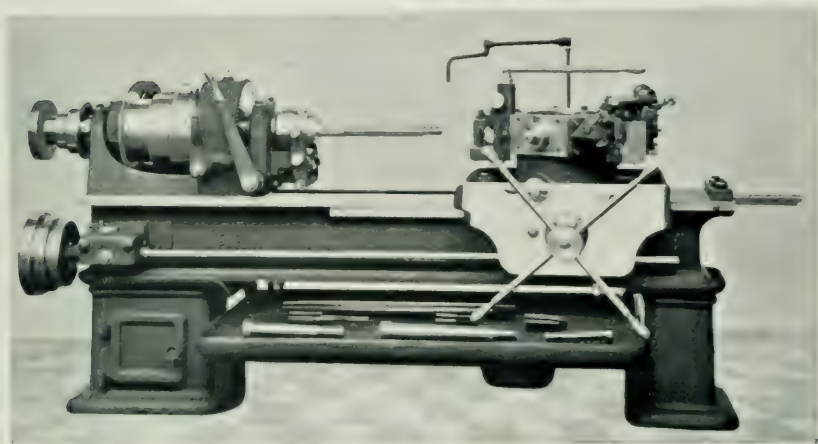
Cross-Turret Lathe (Wolsley).
